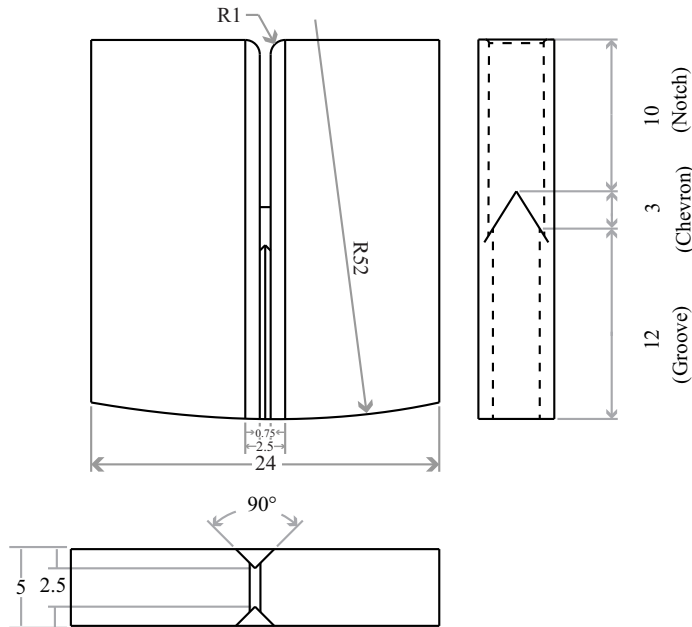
Wedge splitting test specimen geometry with dimensions in mm
